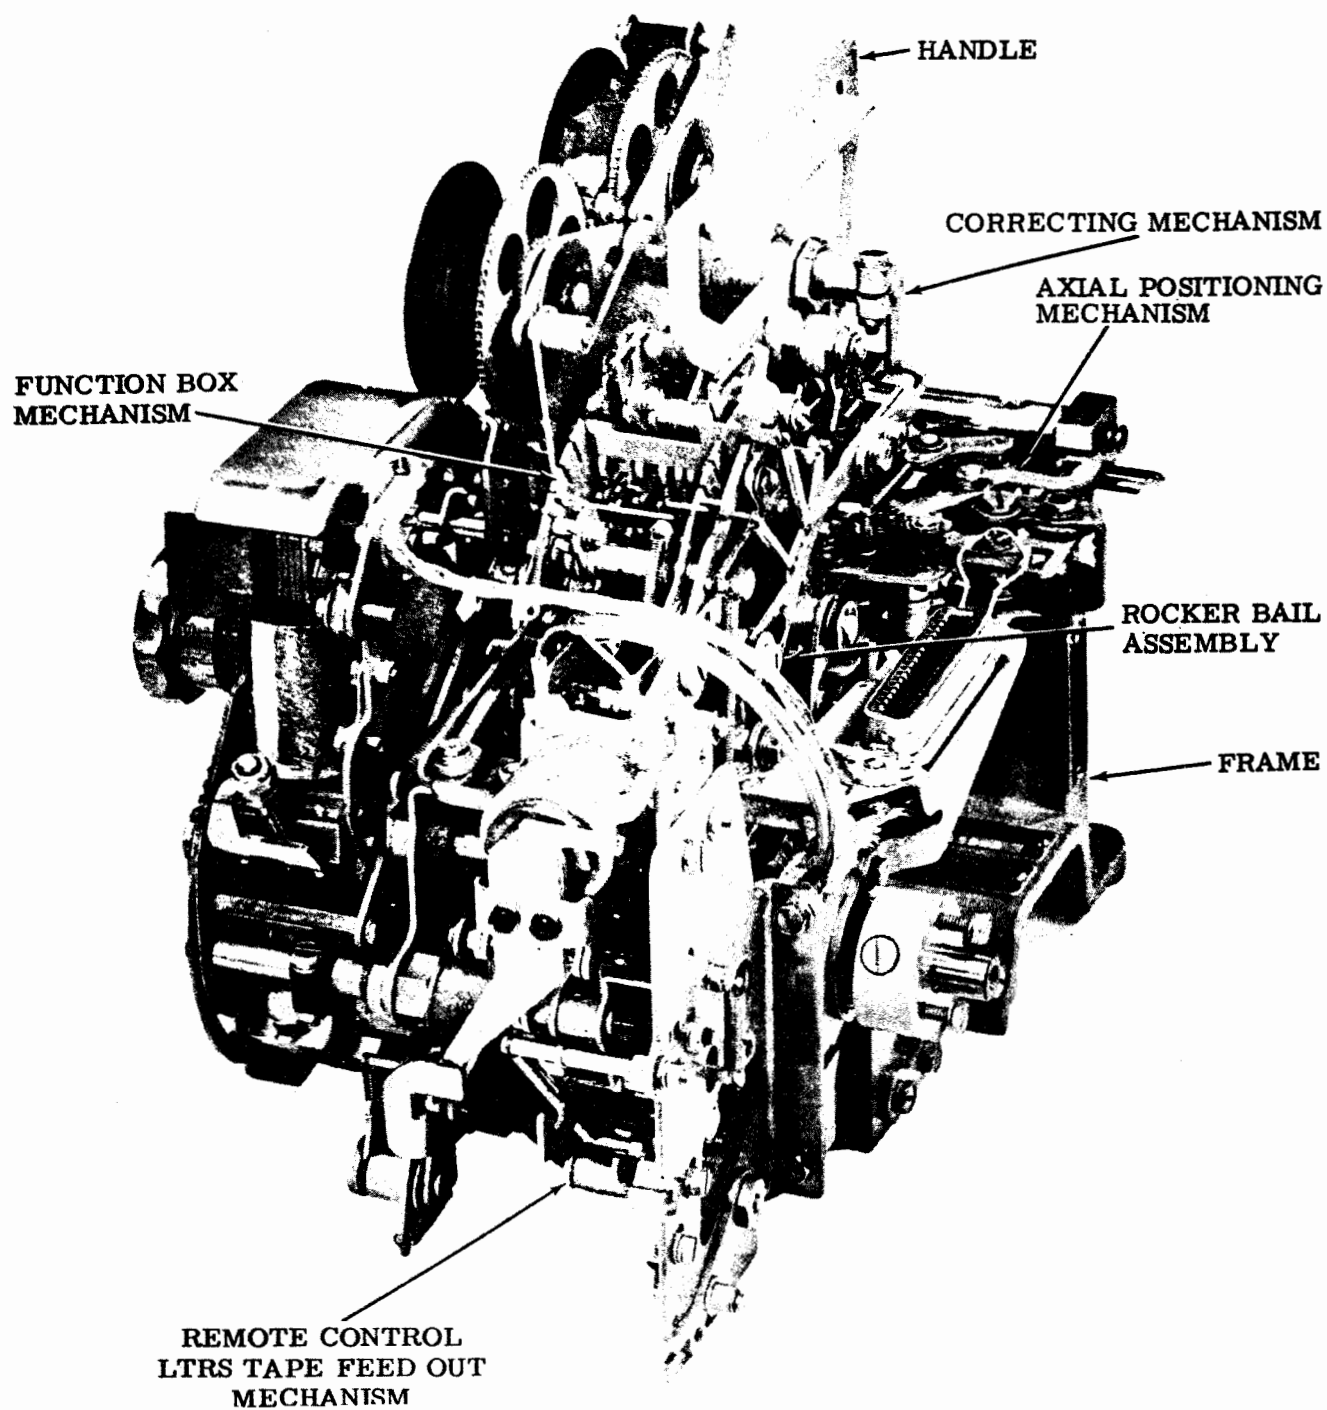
28 Typing Reperforator Unit With Remote Control LTRS Tape Feed Out Mechanism (Rear View)
